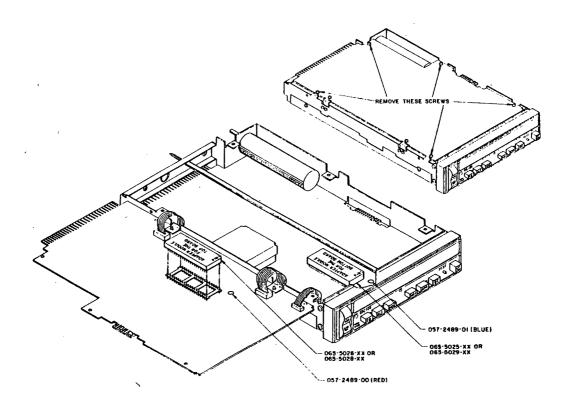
A KC 190/191/192 FROM ABOVE WITH TOP COVER AND TOP PC BOARD FOLDED OPEN
